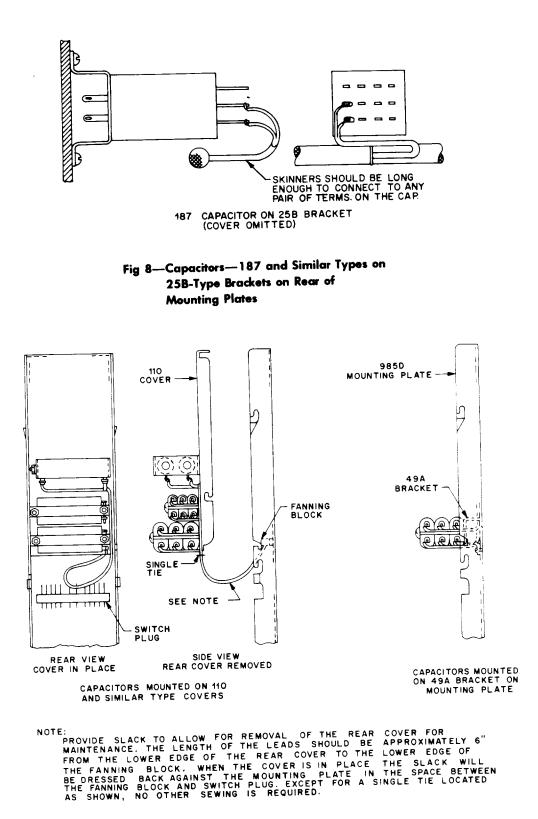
Capacitors—447, 449, and Similar Types, or Similar Apparatus Mounted on Rear Covers or on 49A-Type Brackets on 985- and Similar-Type Switch Mounting Plates
